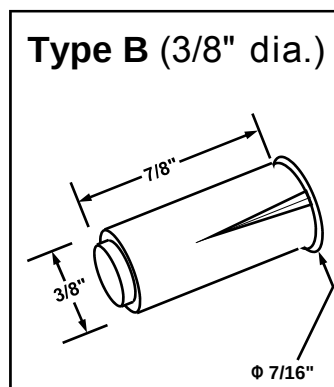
B: DRILL DOOR JAMB HOLE (EITHER 3/8" OR 3/4" DEPENDING ON TYPE)
